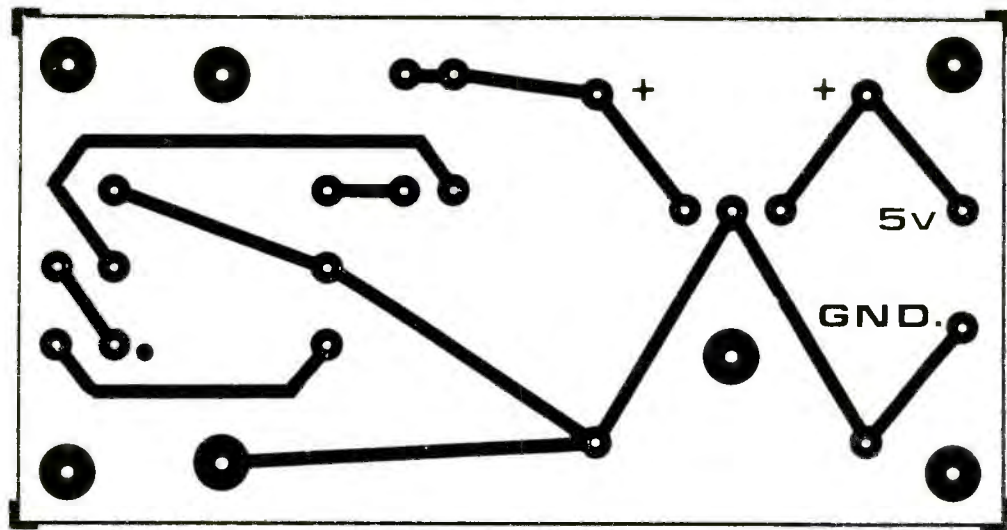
Actual-size etching-and-drilling guides for power supply boards.
